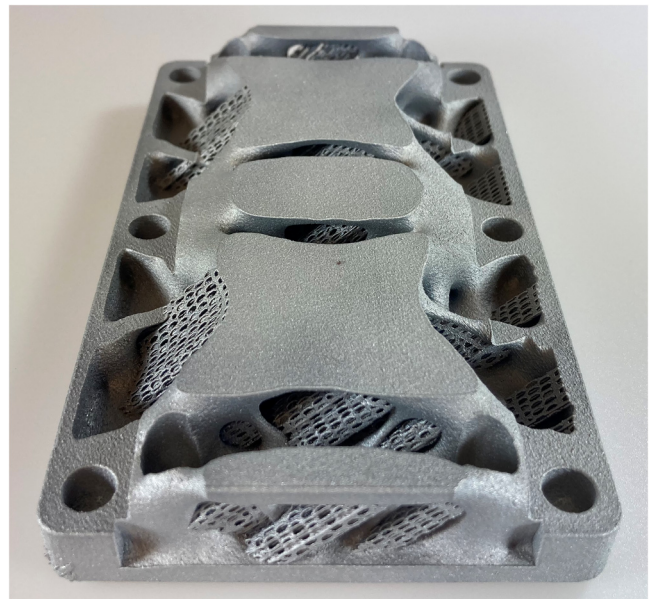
Photograph of an additively manufactured end plate prior to removal of remaining support structures.
